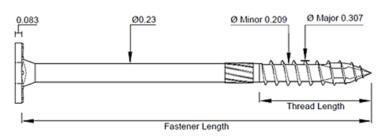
Starborn Structural F23-W Screw (Dimensions in Inches)
